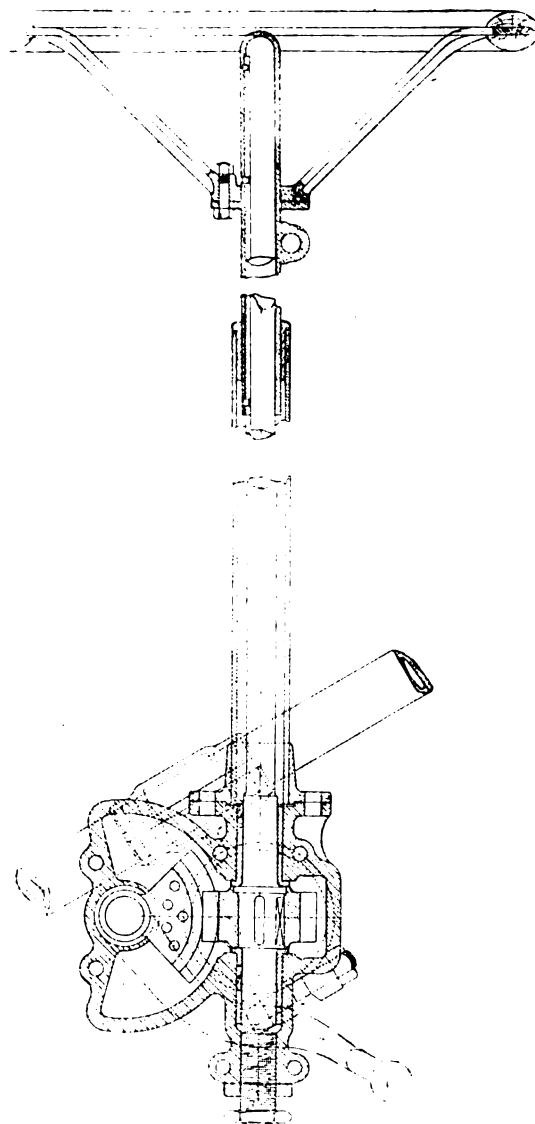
SECTION OF ADJUSTABLE STEERING PILLAR.
